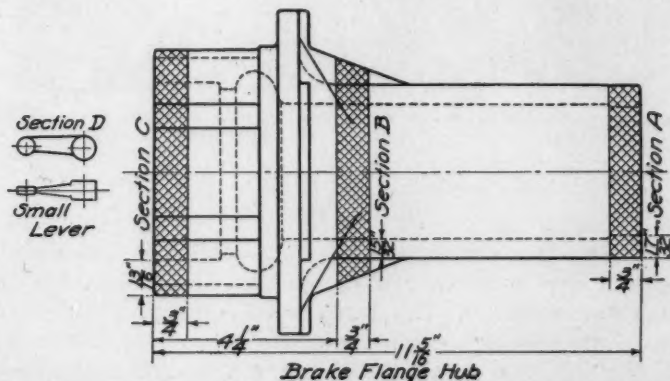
SKETCHES OF CASTINGS FOR ANNEALING TESTS—THE CROSS-HATCHED AREAS OF THE BRAKE FLANGE HUB REPRESENT RINGS MACHINED FROM CASTING FROM WHICH SPECIMENS WERE CAST FOR ANNEALING TESTS.
